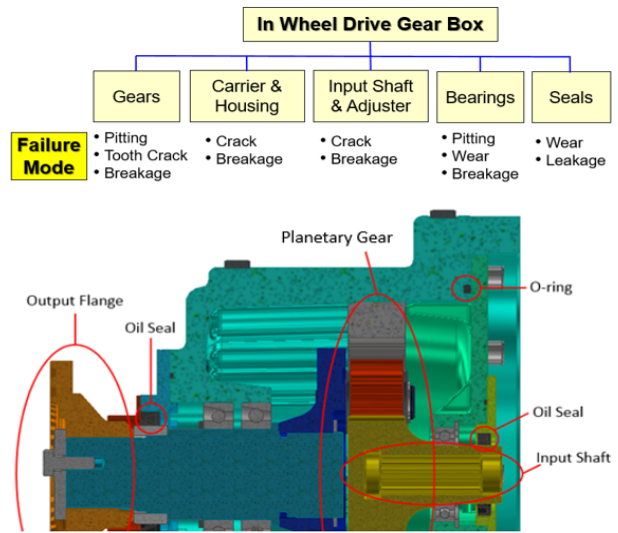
Failure Mode of In-Wheel Drive Gearbox
